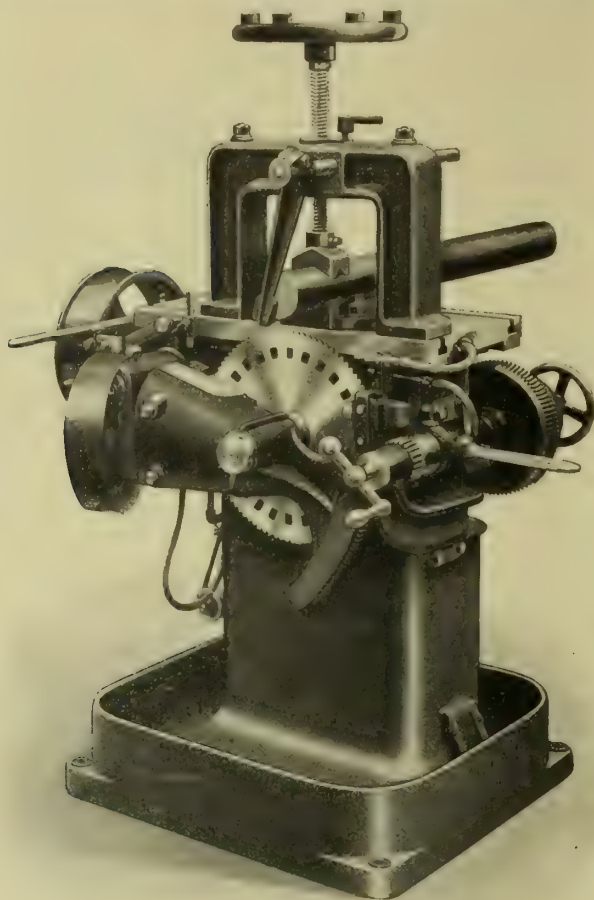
HIGH-SPEED COLD SAWING MACHINE. MESSRS. F. M. FRYE & CO., LONDON.
